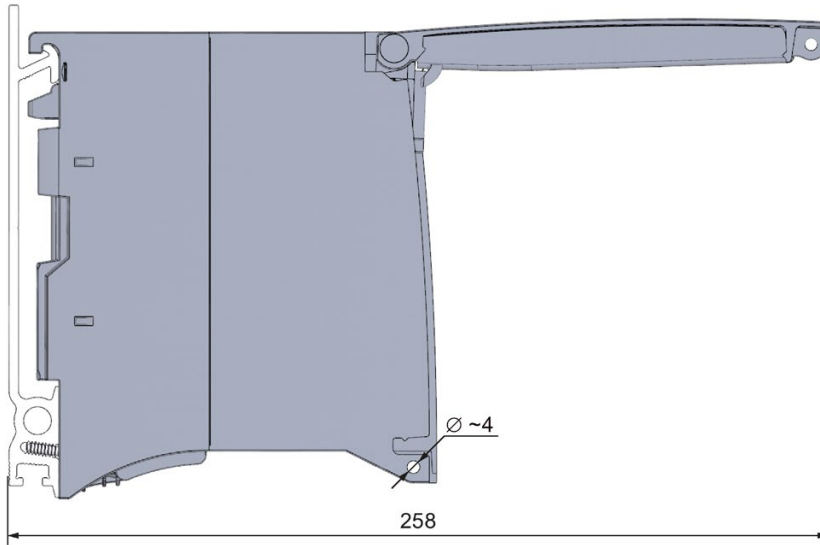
Dimension drawing of the CPU 1517H-3 PN, side view with front panel open
